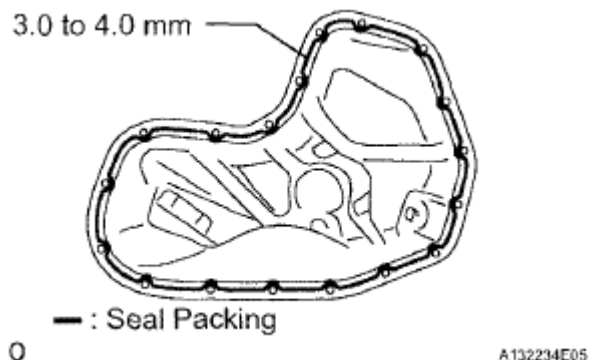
Identifying No. 2 Oil Pan Sub-Assembly Seal Packing Area
